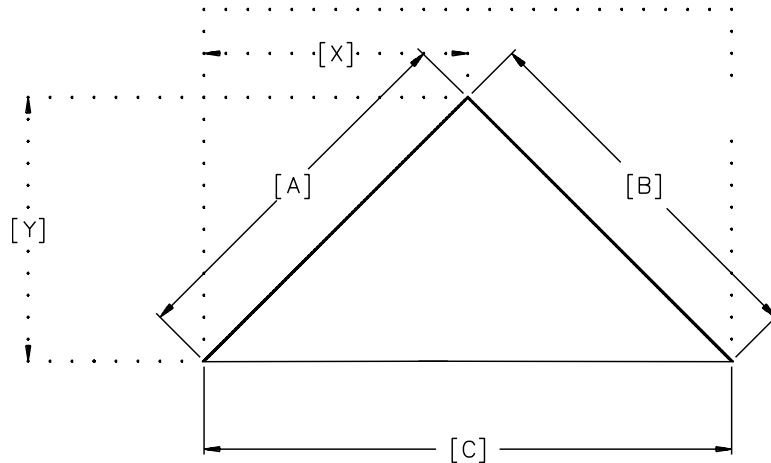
A MASTER DRAWING THAT REQUIRES HIDDEN DIMENSIONS
